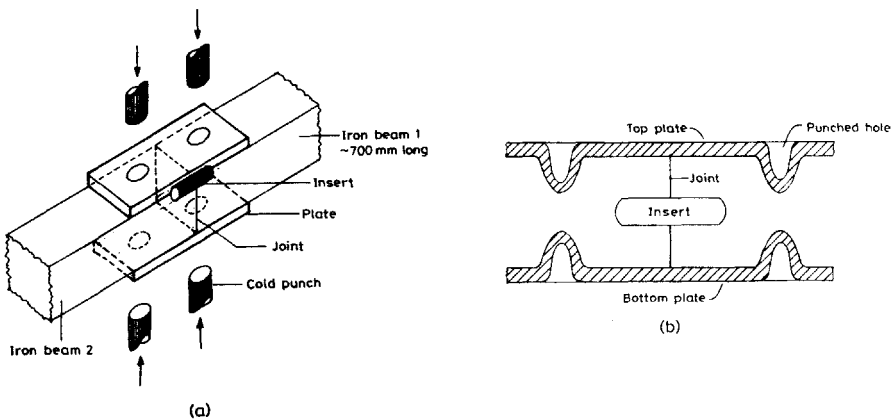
The method of joining the iron blocks and butt welding of the plate on the pillar surface, as proposed by Prakash (1989): (a) isometric view, and (b) cross-section.
